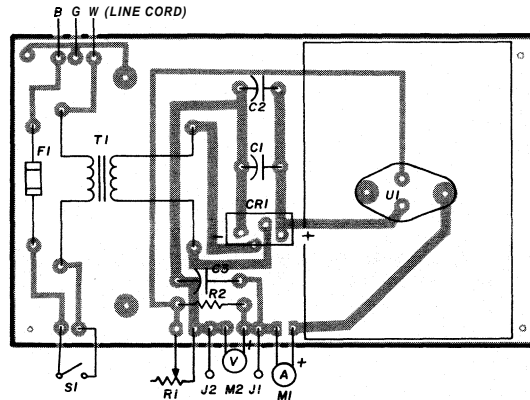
Component side of the circuit board; photographs show placement of the power transformer, heatsink, and other larger components.
